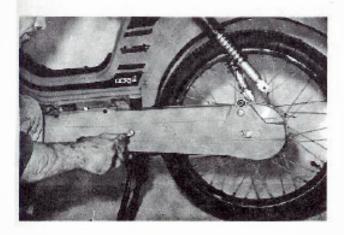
Chain cover. Remove lower shock mounting bolt. Swing shock absorber to rear of moped. Remove two bolts holding cover to swing arm. Remove chain cover.
